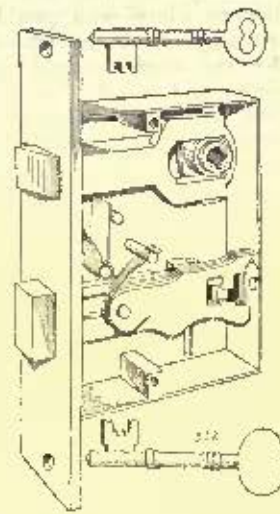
Master-keyed Lock. Hopkins & Dickinson Mfg. Co.
